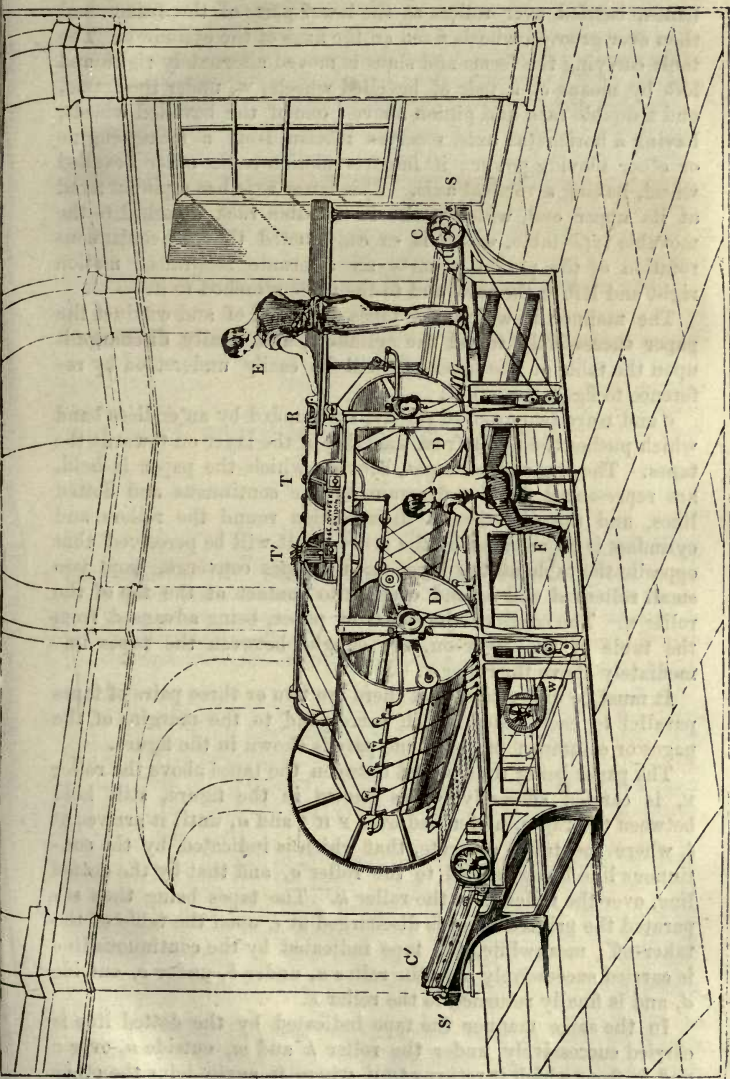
Applegath and Cowper's Double Printing Machine.
